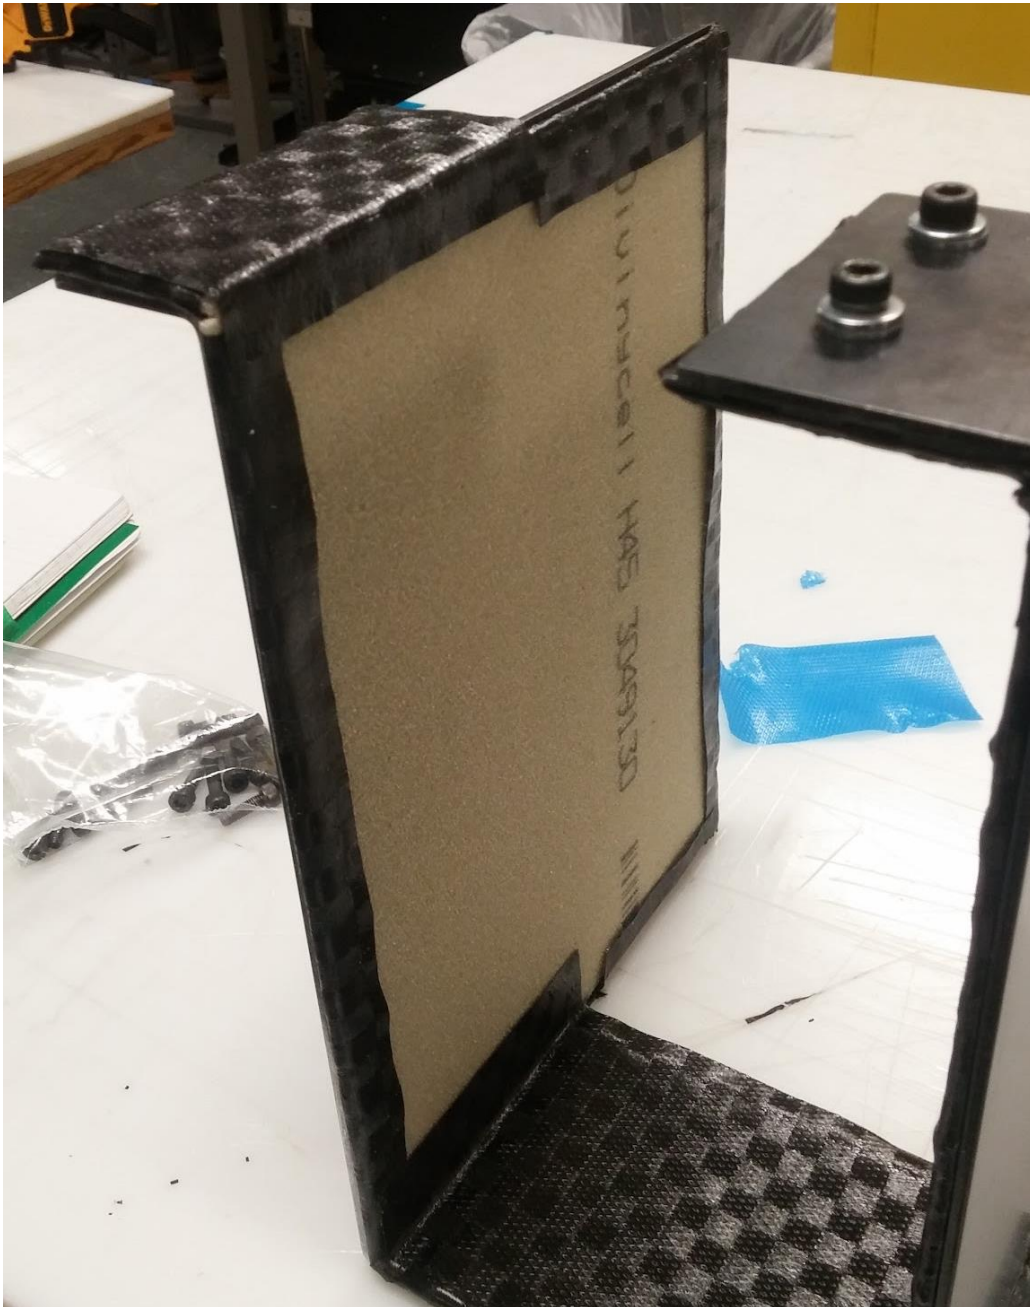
Core placed on first layer of carbon and edges folded over the sides of the core.
